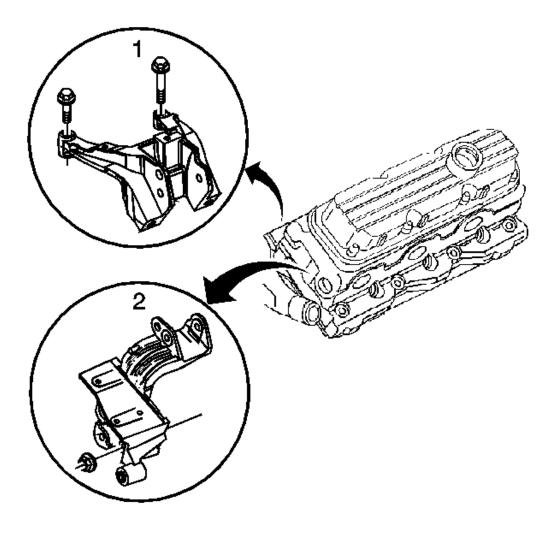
View of Engine Mount Strut Upper Bracket Bolts
